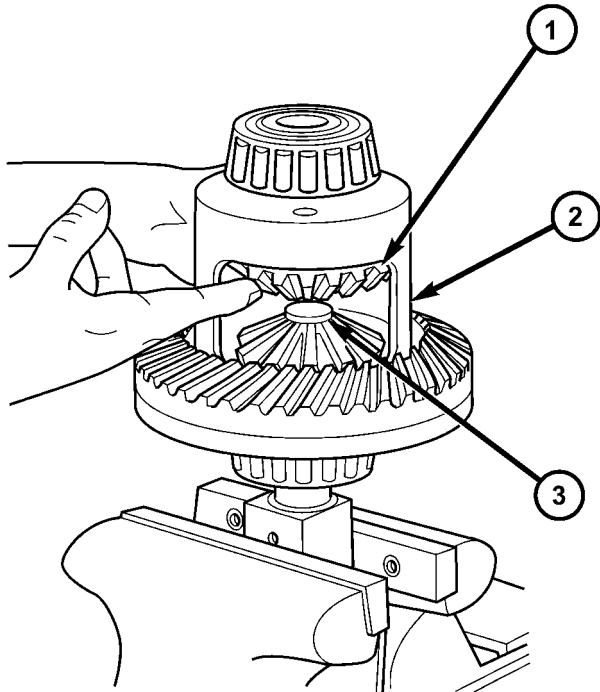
CLUTCH PACK AND LOWER SIDE GEAR
